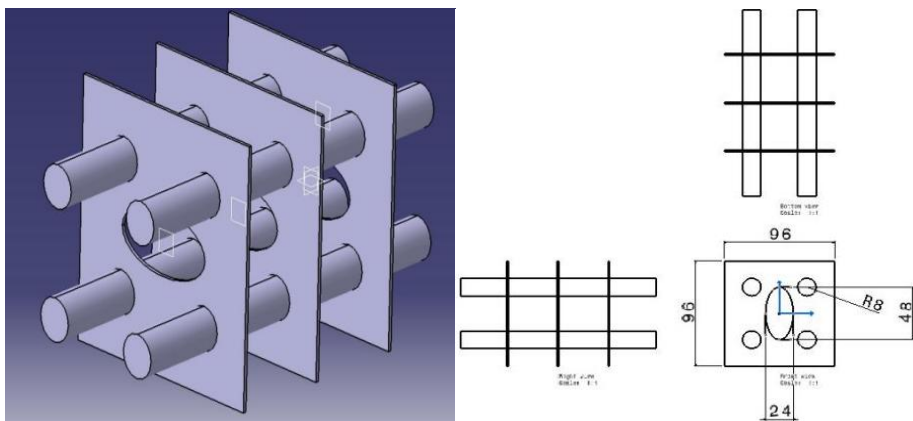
3D Model Tube and Finned Type Heat Exchanger with Ellipse 1 Cutout
